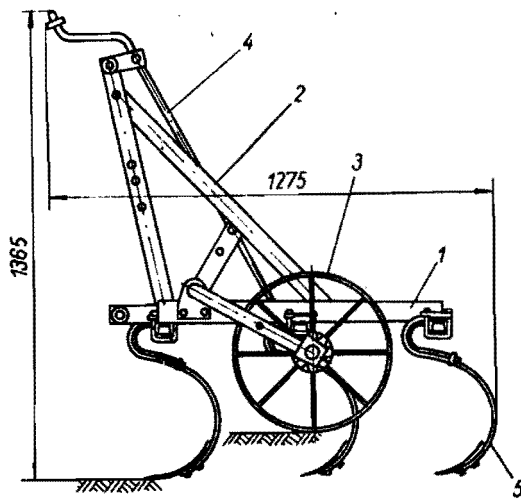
Mounted cultivator with spring tines: 1 — frame; 2 — mounting column; 3 — gauge wheel; 4 — spindle for controlling gauge-wheel setting; 5 — spring tine.
